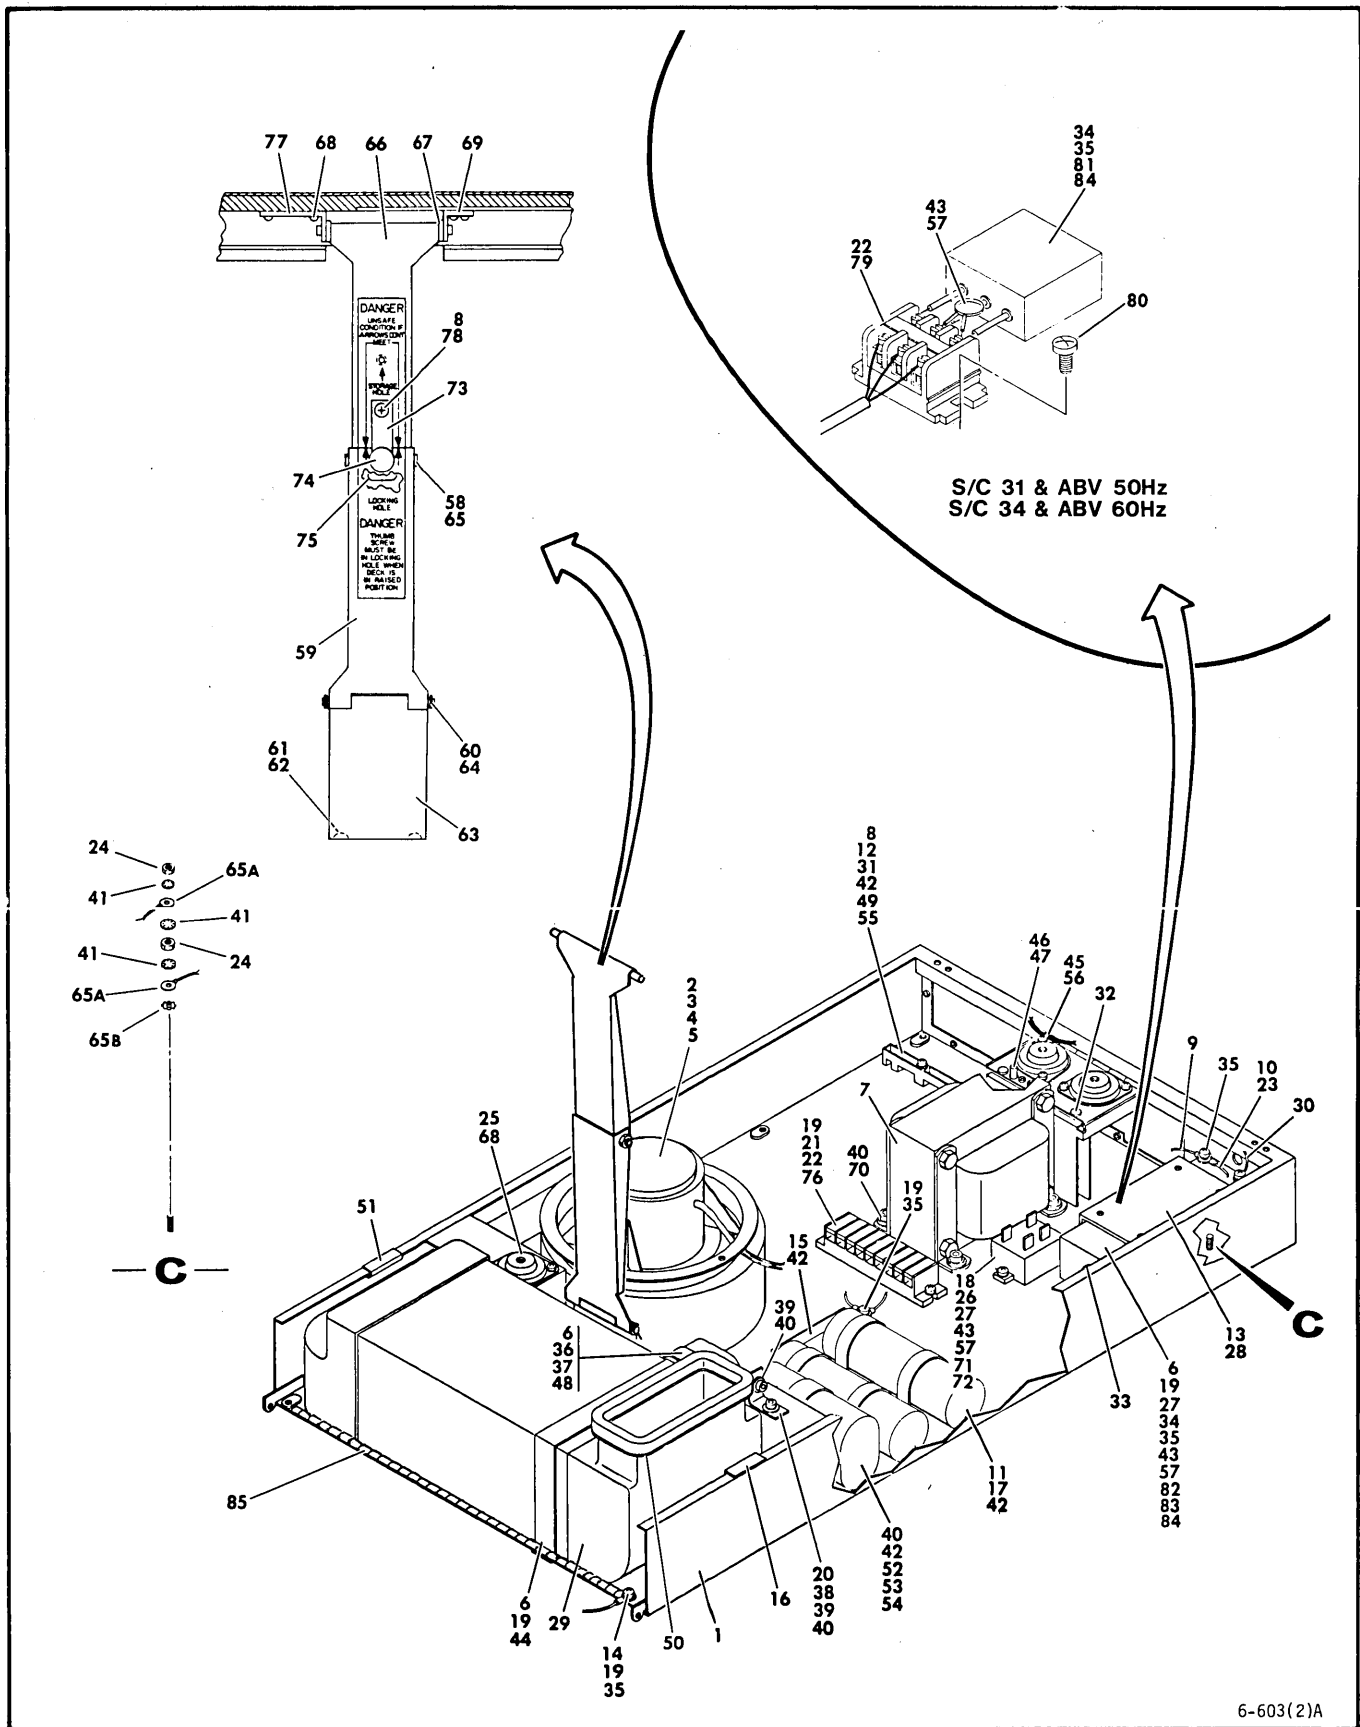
I/O CABLE ASSEMBLY (SHEET 2)
